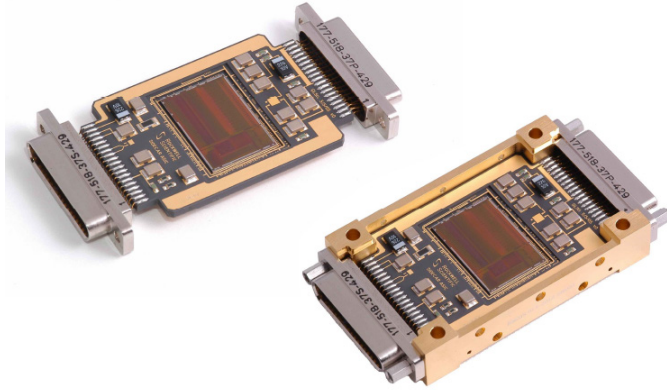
JWST flight package: ceramic circuit board with ASIC die and passive components, shown without and with metal housing. The dimensions are about 74 x 38 x 10.4 mm³.
